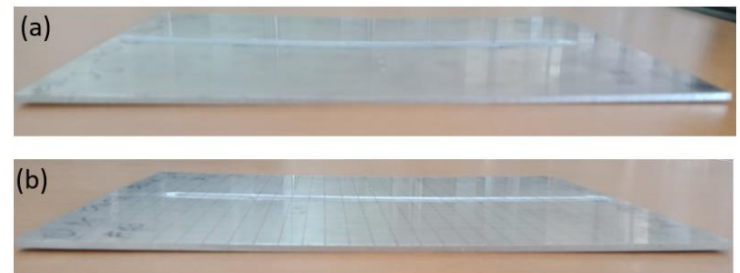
Distortion profiles; (a) as welded; (b) mechanical.
